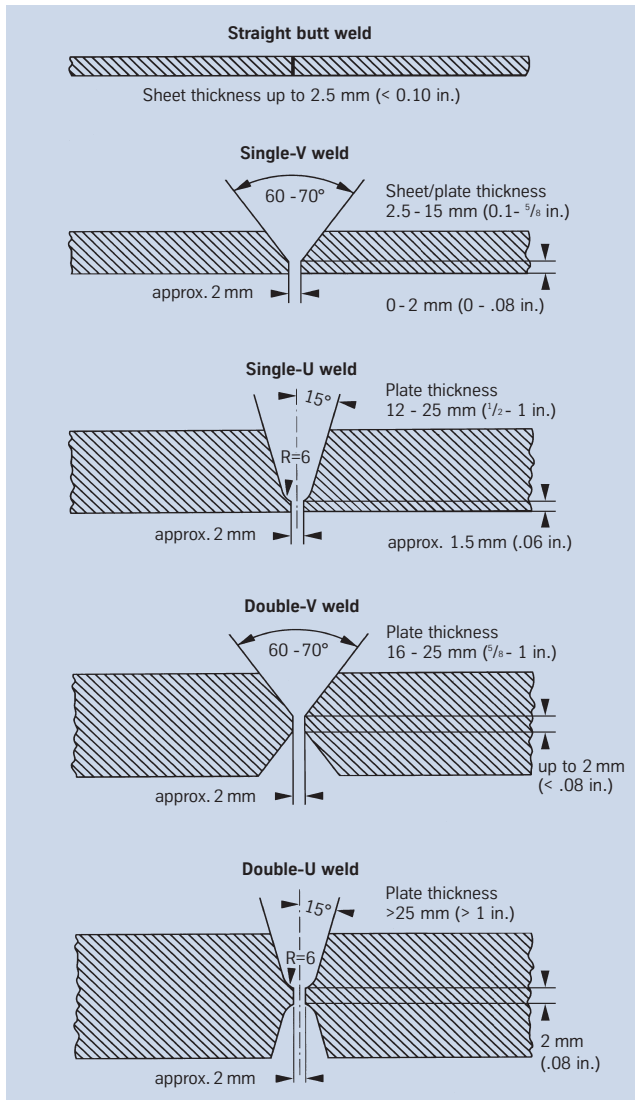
Edge preparation for welding of nickel alloys and special stainless steels.
